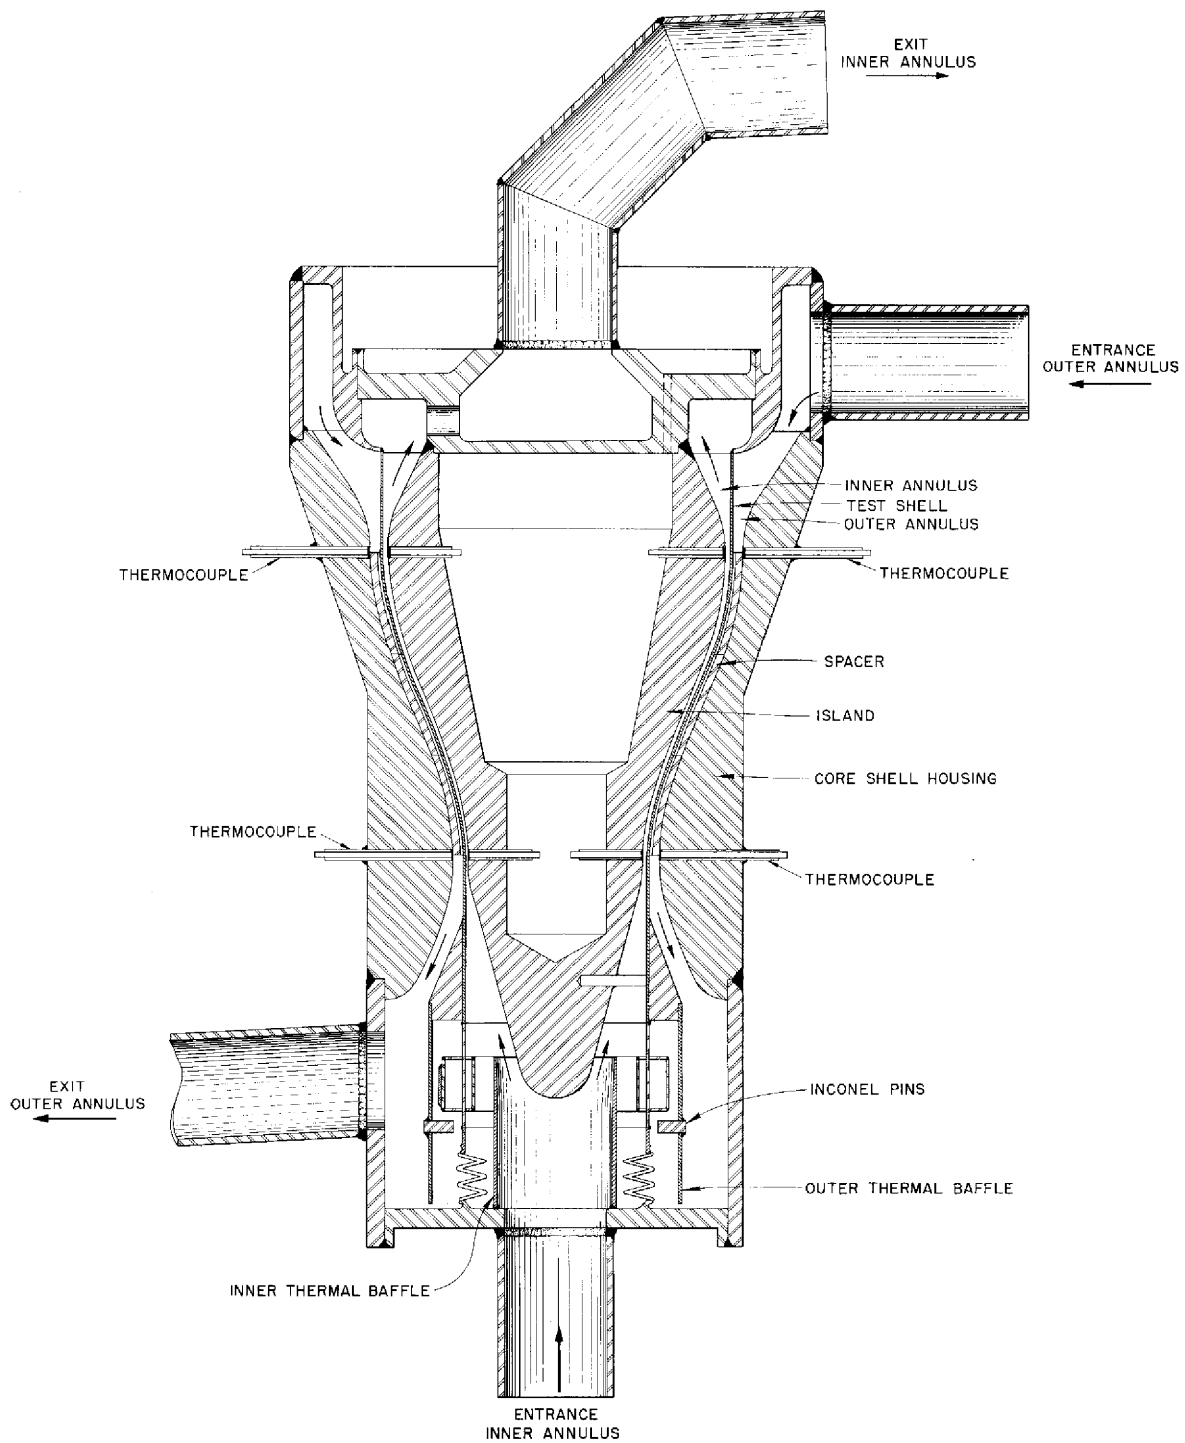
Core-Shell Thermal-Stability Test Assembly.
